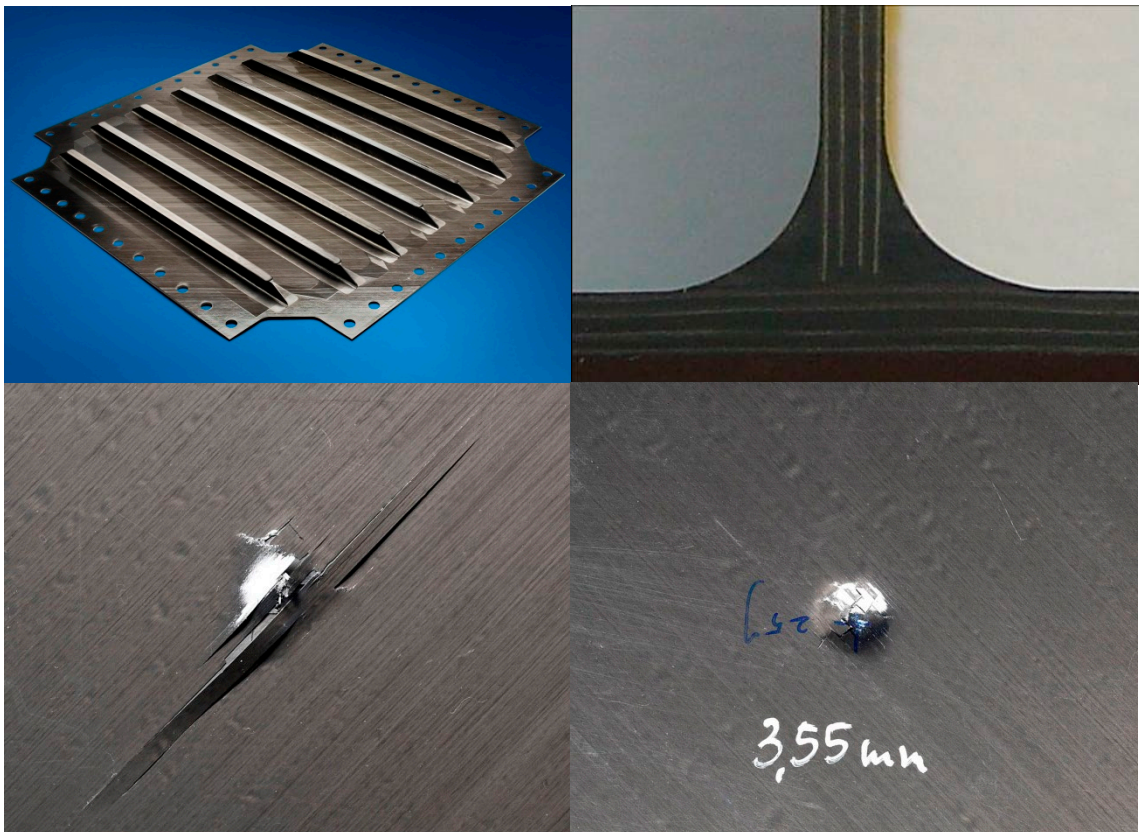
Panel with butt-joints, a detail of the butt-joint and a typical impact of 25 J on a 2 mm thick panel
